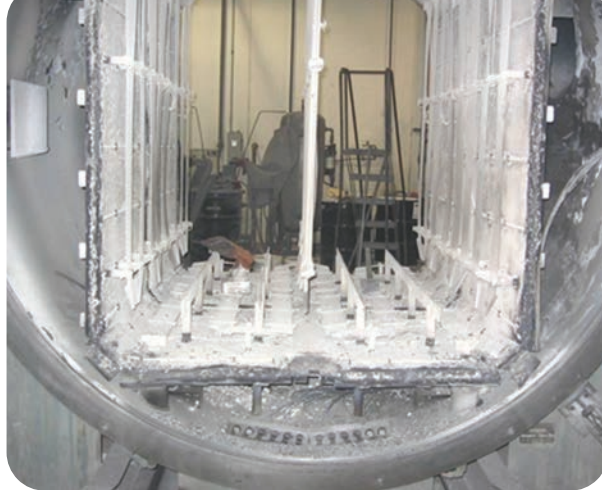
Four-year-old vacuum aluminum brazing furnace.
